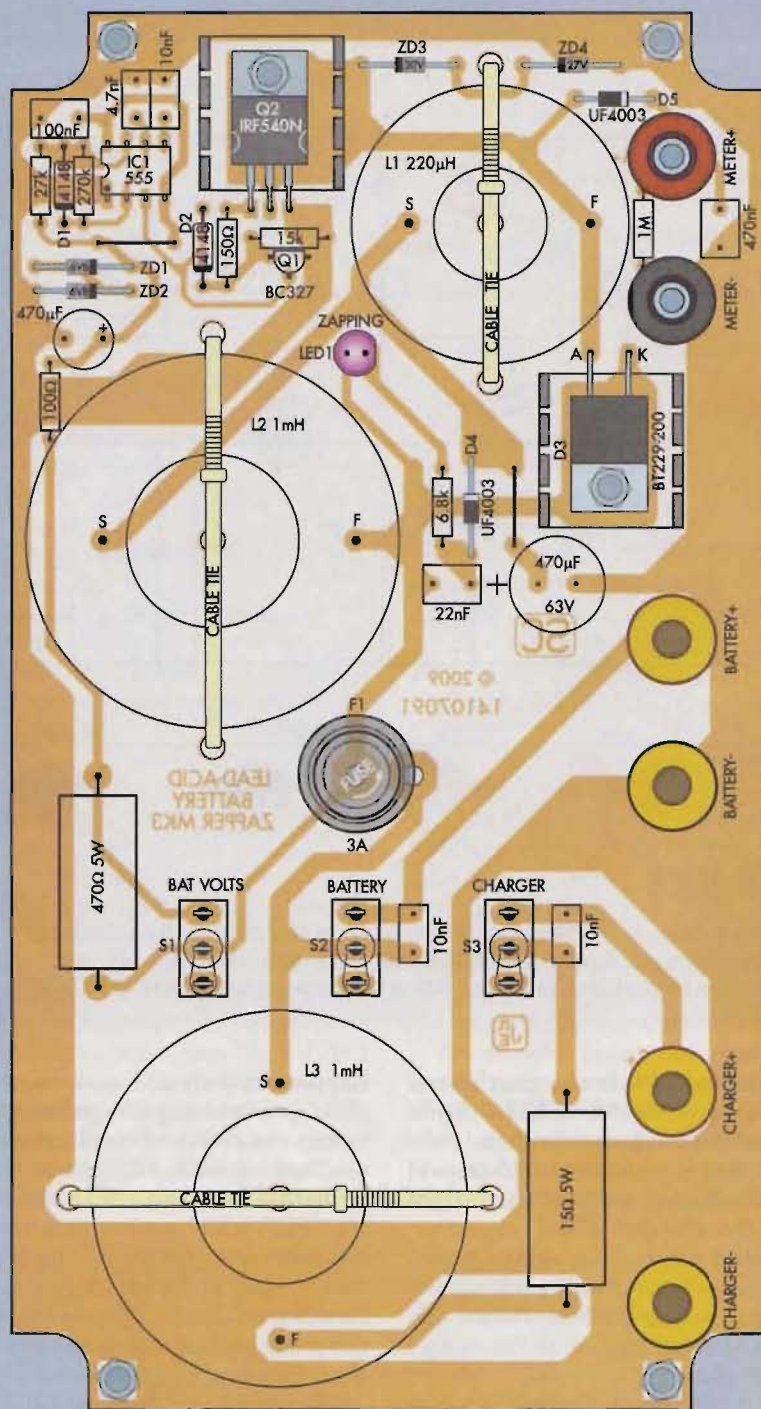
follow this parts layout diagram to assemble the PC board and make sure that all polarised parts are orientated as shown. The large inductors (L1-L3) are secured to the board using plastic cable ties which pass through holes on either side.
